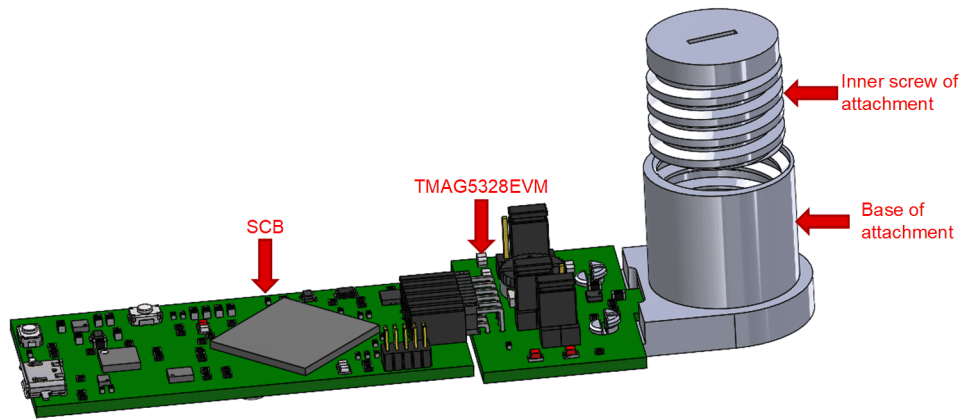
TMAG5328EVM Connected to Head-On Linear Displacement 3D Print
